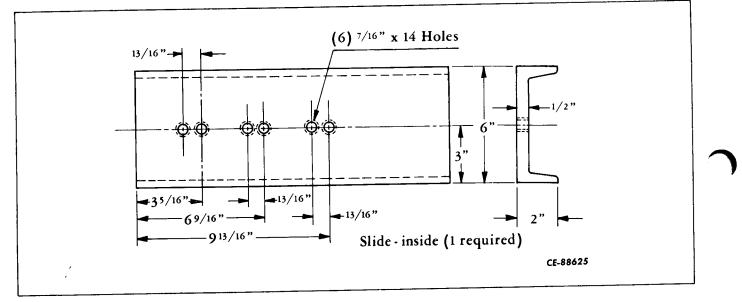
Item IV. Slide-Stand Weldment (Right Hand).
